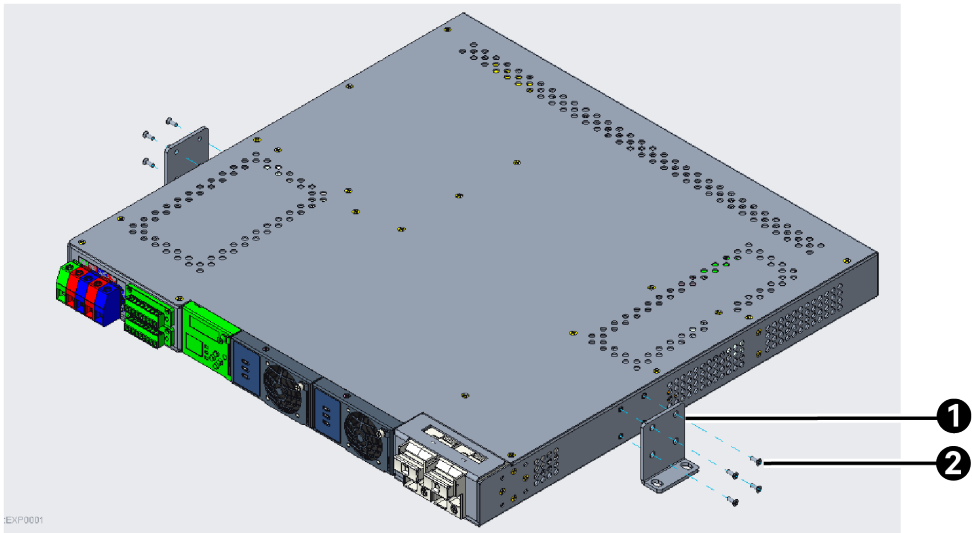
Exploded View Wall Mount: Solar Add-On Shelf with 19-inch Mounting Brackets
